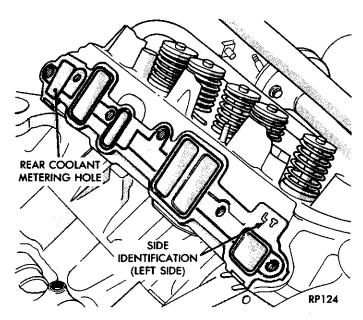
Intake Manifold Side Gaskets (Left Side Shown)
